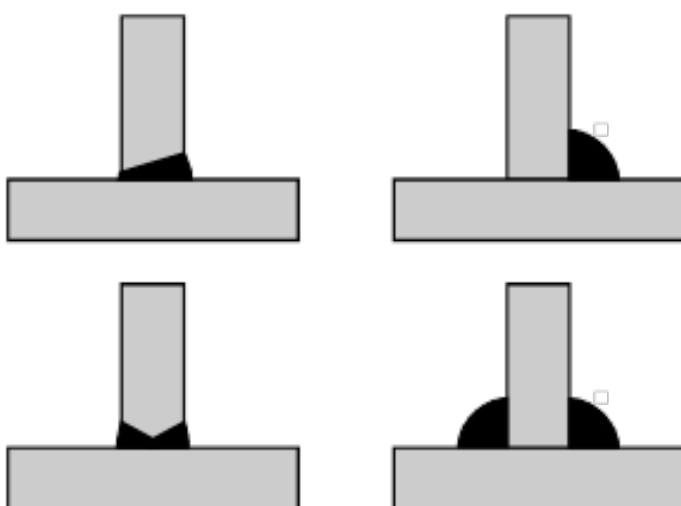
Equivalent section of butt welds and fillet welds in the T-joint
